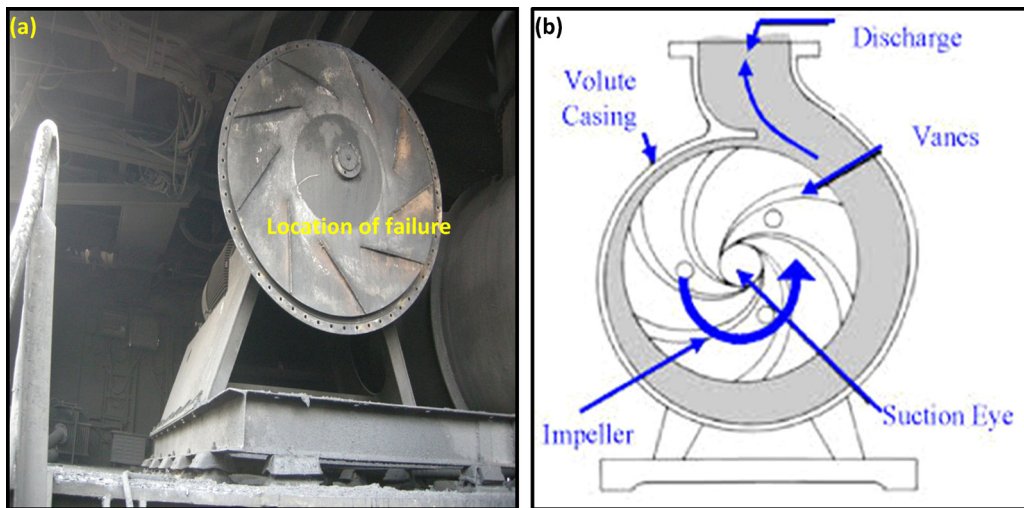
(a) The assembly site of the failed impeller; (b) schematic drawing of the impeller.
